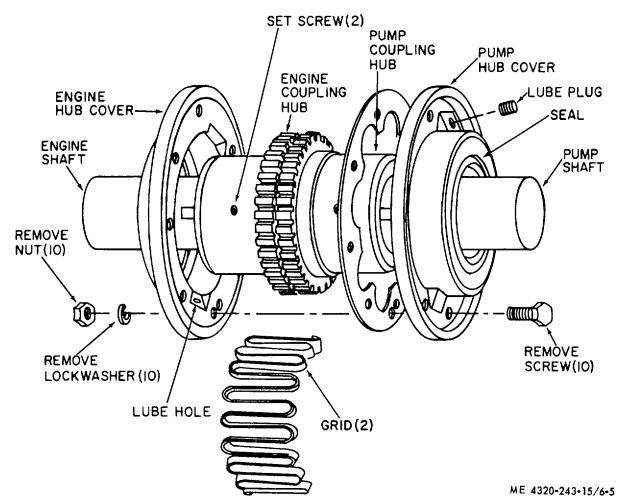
Flexible drive coupling, alinement, assembly and disassembly.
